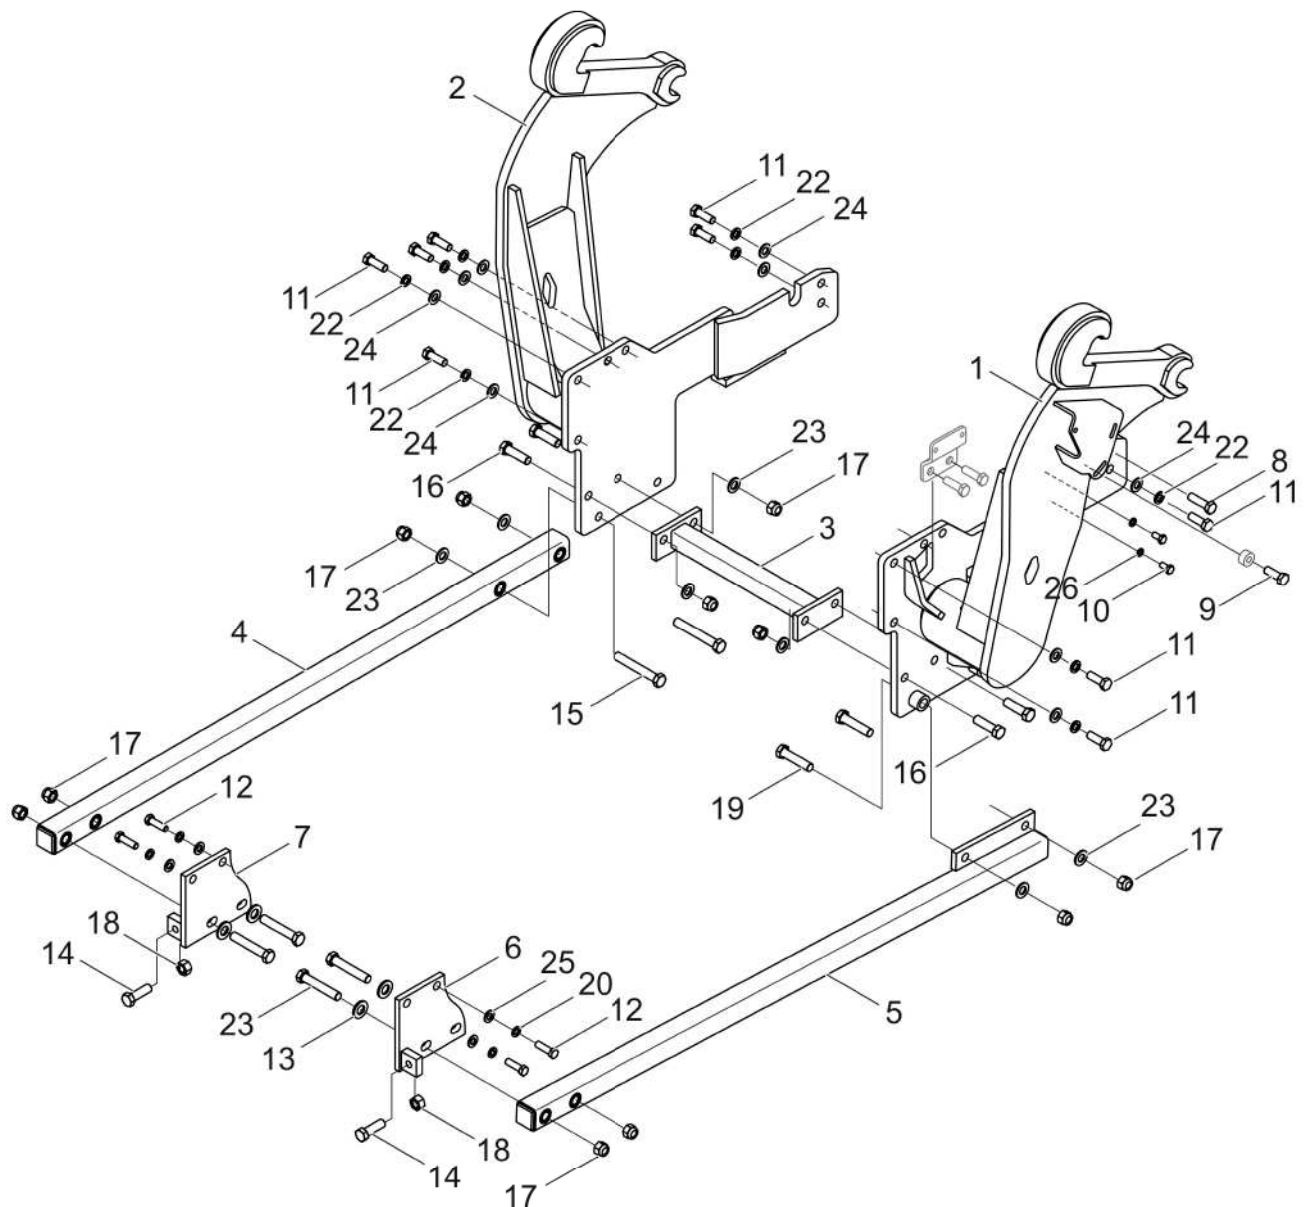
A Mounting support frame on KIOTI dk451C tractors
